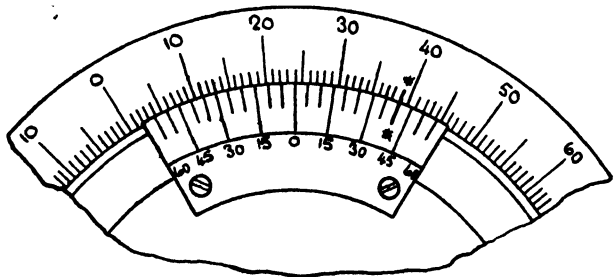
THE UNIVERSAL BEVEL PROTRACTOR
